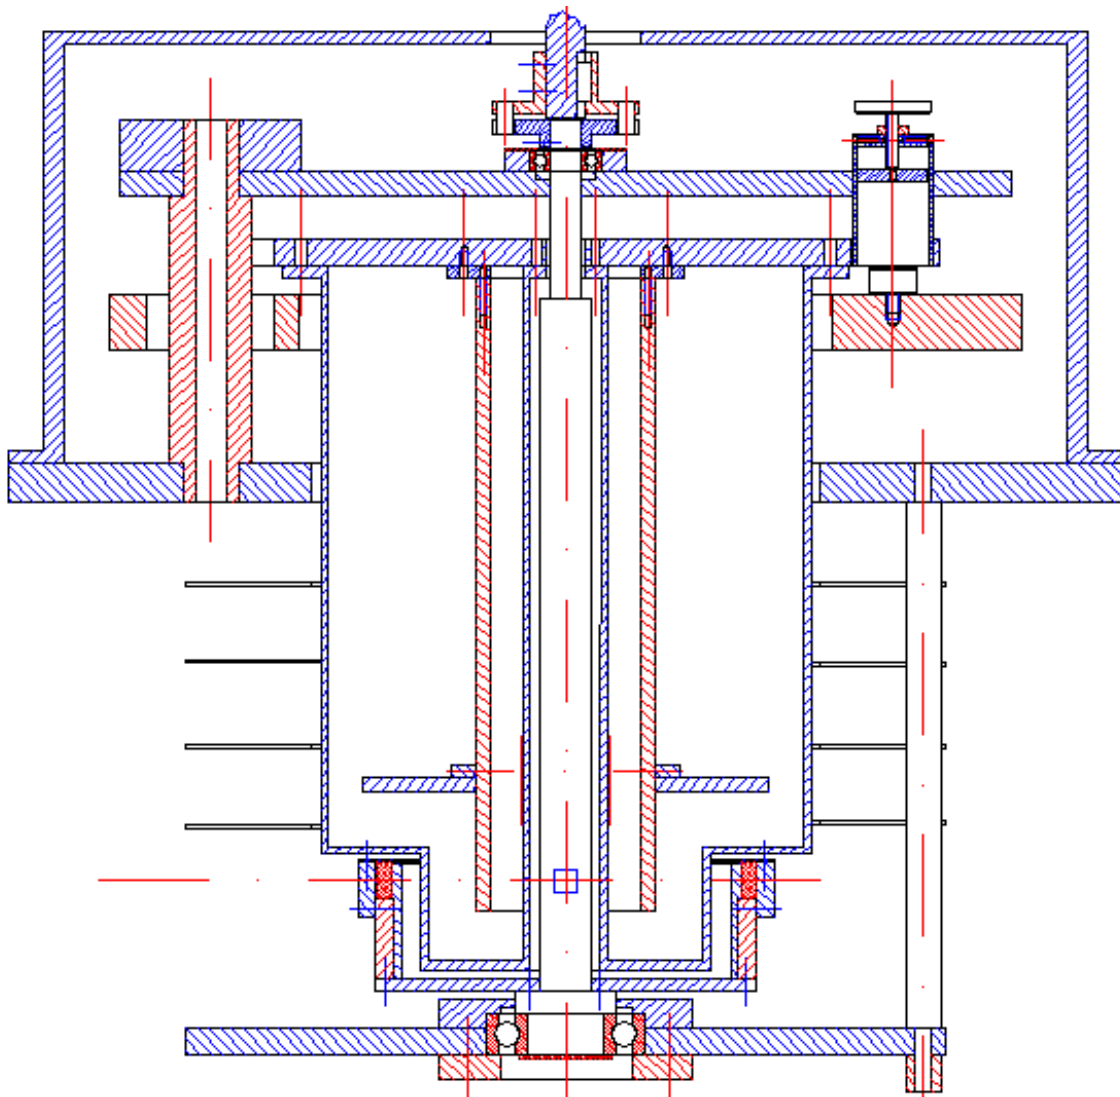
Mechanical drawing (The drawing is simplified in order to avoid confusions).
